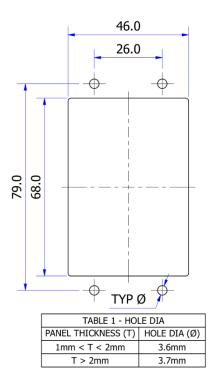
Panel cut out for flush mounting Terminal Block Type TBD-R2 base
